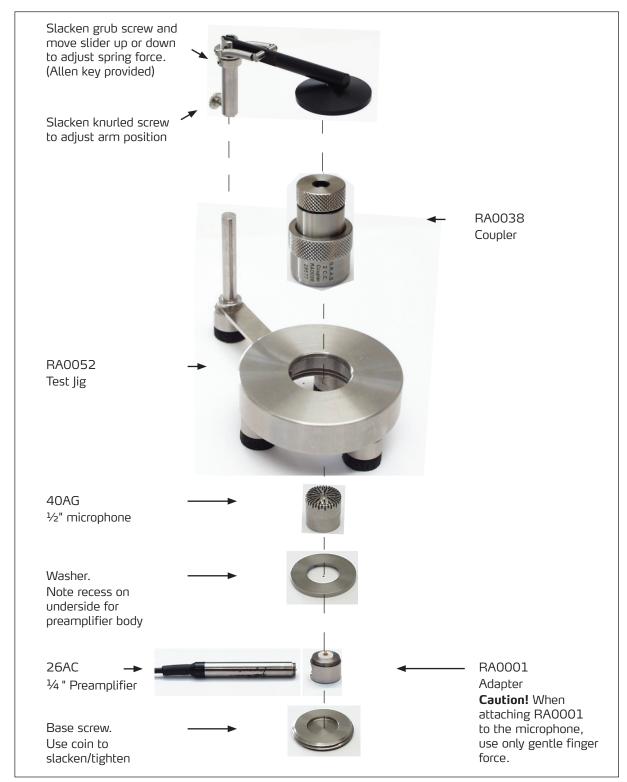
Exploded view of the user-serviceable components of the 43AB 2cc Coupler Kit
